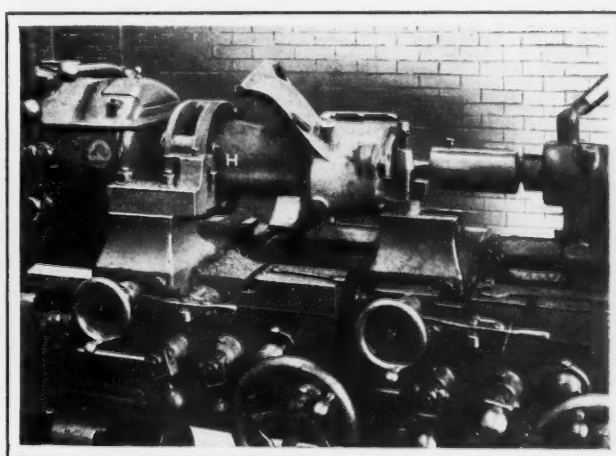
Set-up employed in an Engine Lathe for accurately facing the Bell Housing Flange and Rear End in Relation to the Main-shaft Bearings
